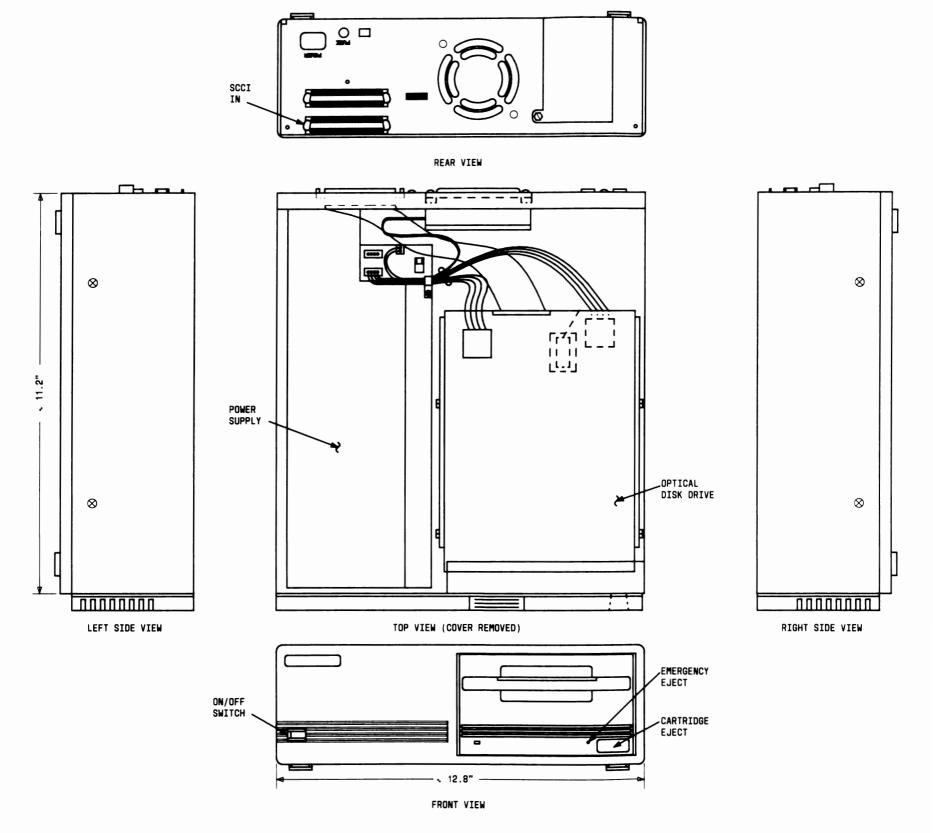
AT&T SCSI Rewritable Optical Disk Cabinet Assembly Drawing
